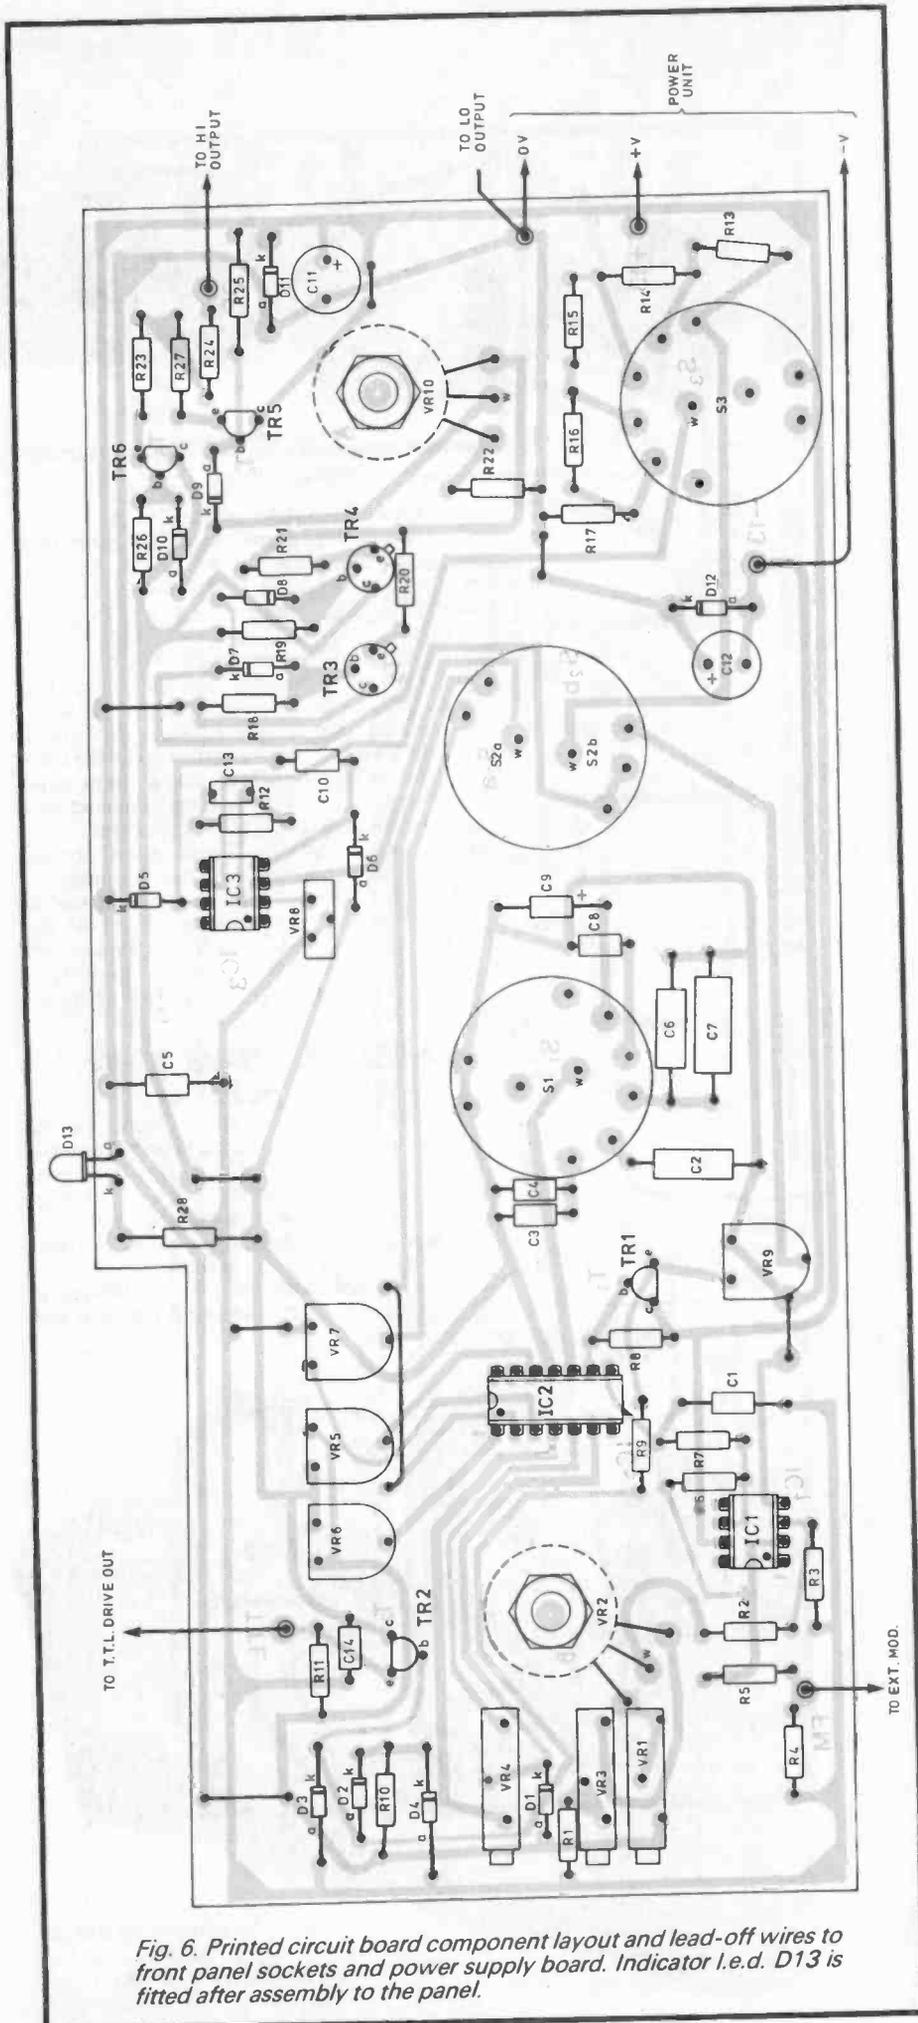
Printed circuit board component layout and lead-off wires to front panel sockets and power supply board. Indicator i.e.d. D13 is fitted after assembly to the panel.
